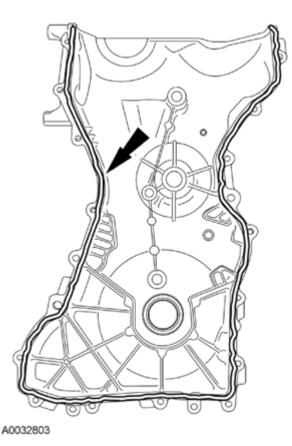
Locating Bead Of Silicone Gasket On Front Cover Courtesy of FORD MOTOR CO.
